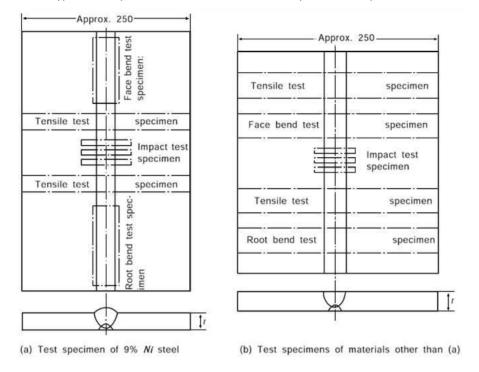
Test Specimens for Production Weld Test (Units: mm, thickness 1)
